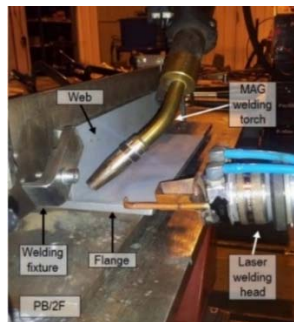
Experimental setup: hybrid high-energy laser and arc welding of T-butt joint, flat welding position
